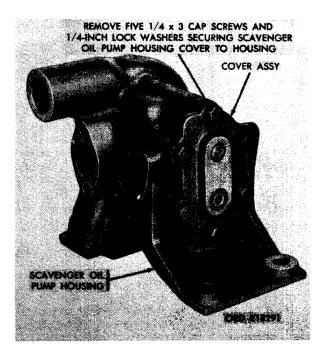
REMOVING OR INSTALLING CAP SCREWS SECURING COVER ASSEMBLY TO SCAVENGER OIL PUMP HOUSING.
